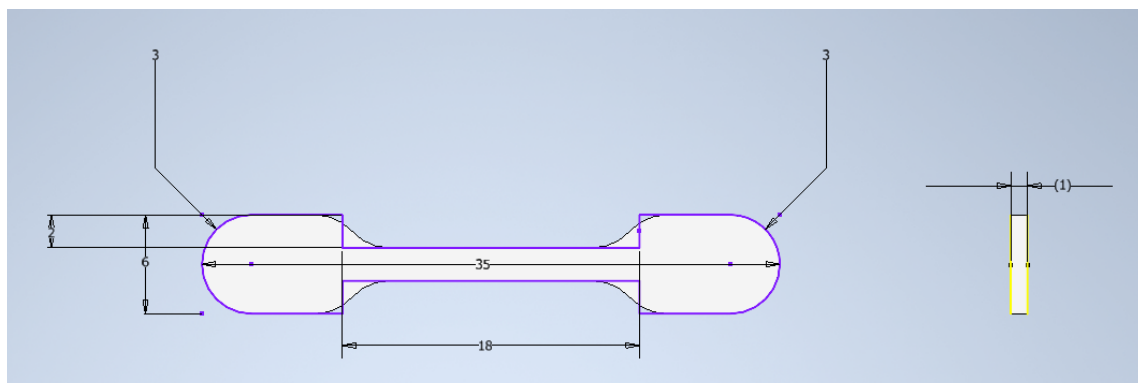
Dimensions of the manufactured tensile test samples (in millimeters). This drawing was made with Autodesk Inventor.
